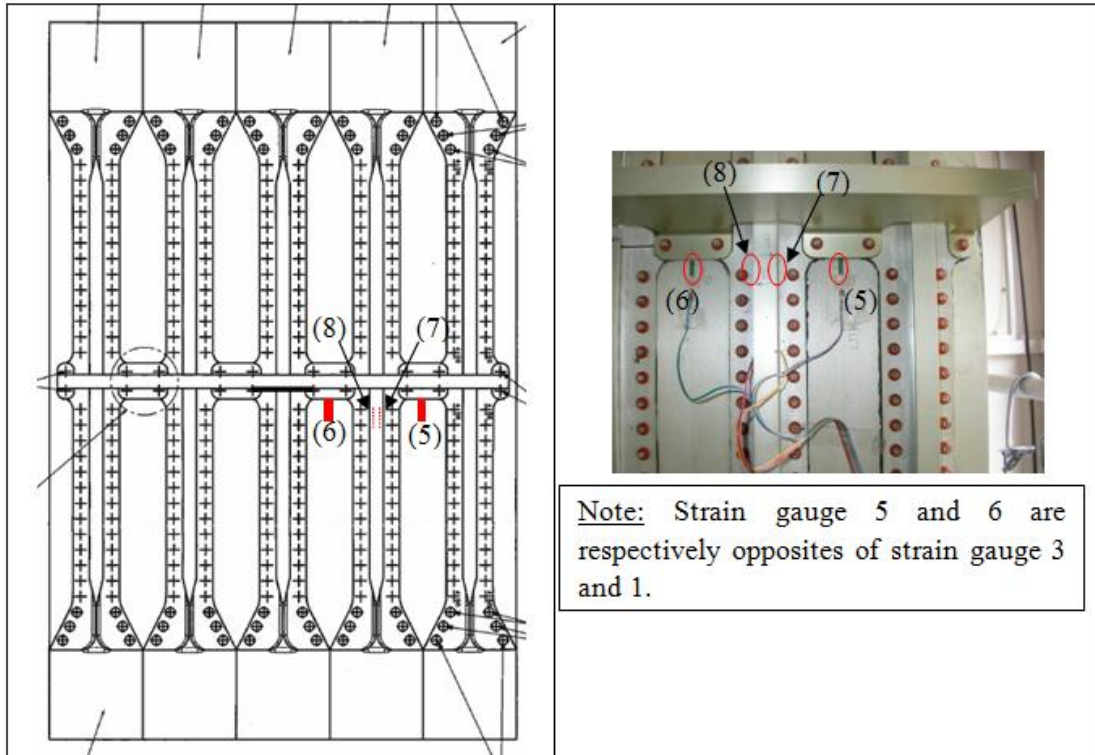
Panel 3 strain gauge location – Back view (strain gauge 5, 6; 7 and 8)
